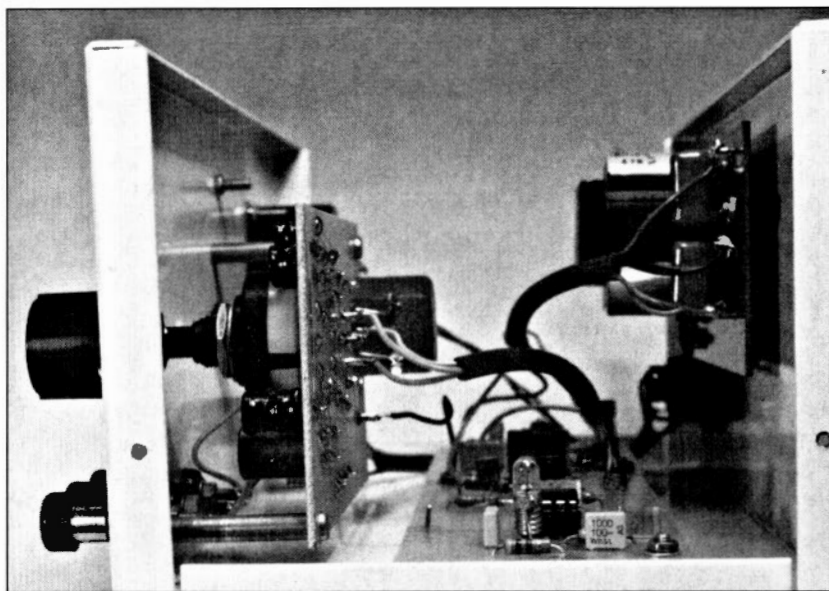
Photograph showing method of mounting bridge-board, stand-off mounts, inter-wiring and the power supply panel which is fixed on the rear casing.
